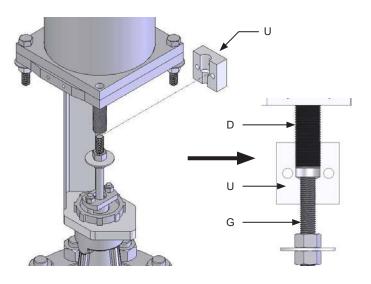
Center of Rod Clevis holes are approximately centered with gap between Stud Extension and Valve Stem (Section of Housing Assembly hidden for clarity)
